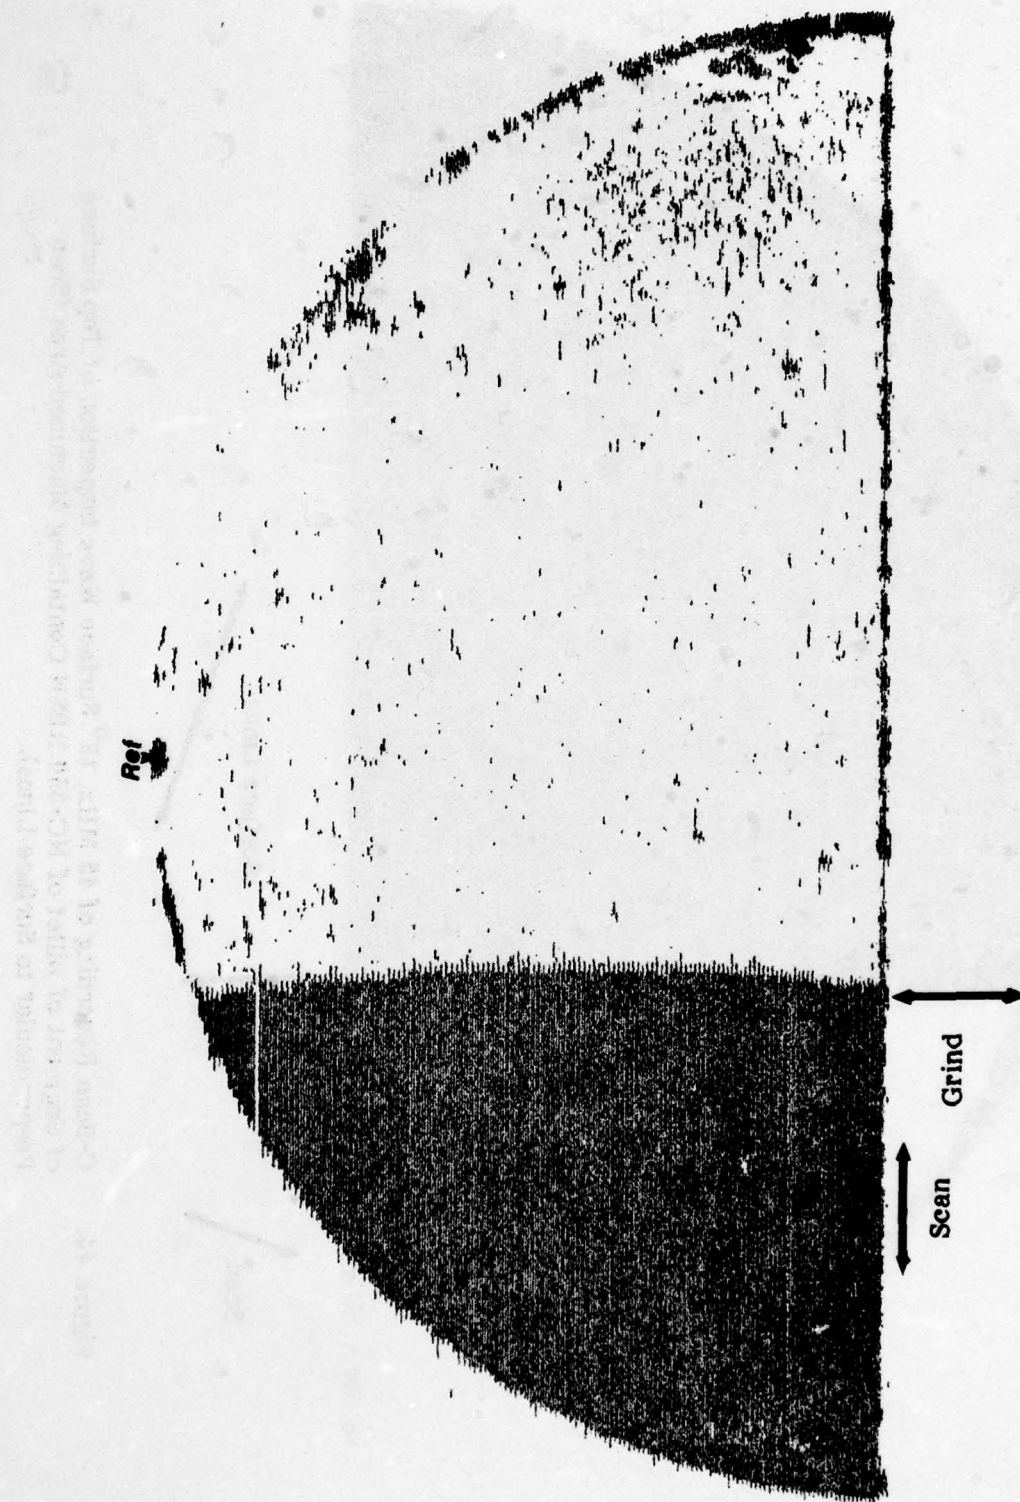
C-scan Recording of 45 MHz, 18° Surface Wave Inspection of Top Surface of Segment of Billet of NC-350 RBSN Containing Machined Area (Scan Perpendicular to Grind).
